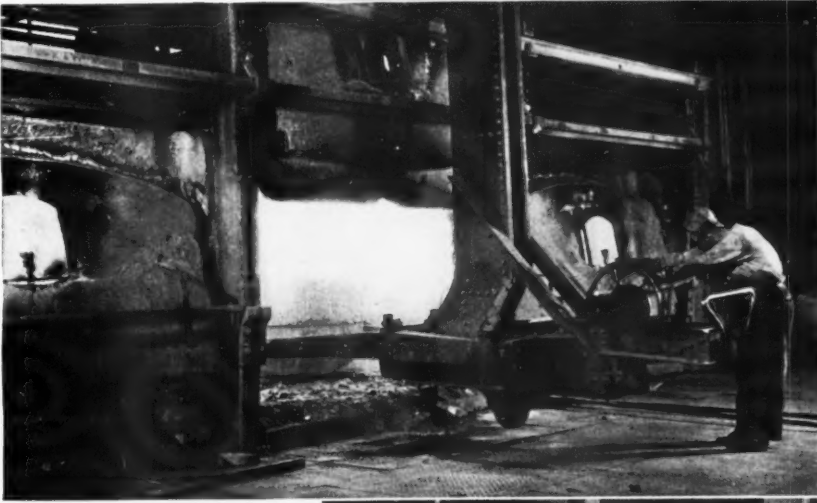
Pot-casting; a process still used for making smaller batches of special glasses — involves melting in special pots, and then pouring between the forming rolls.
